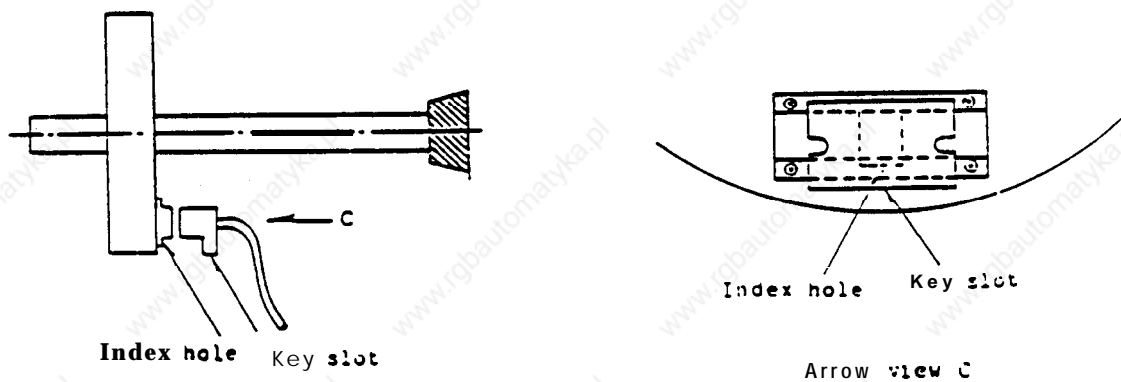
Mounting onto a flat surface on the load side of the rotating body
